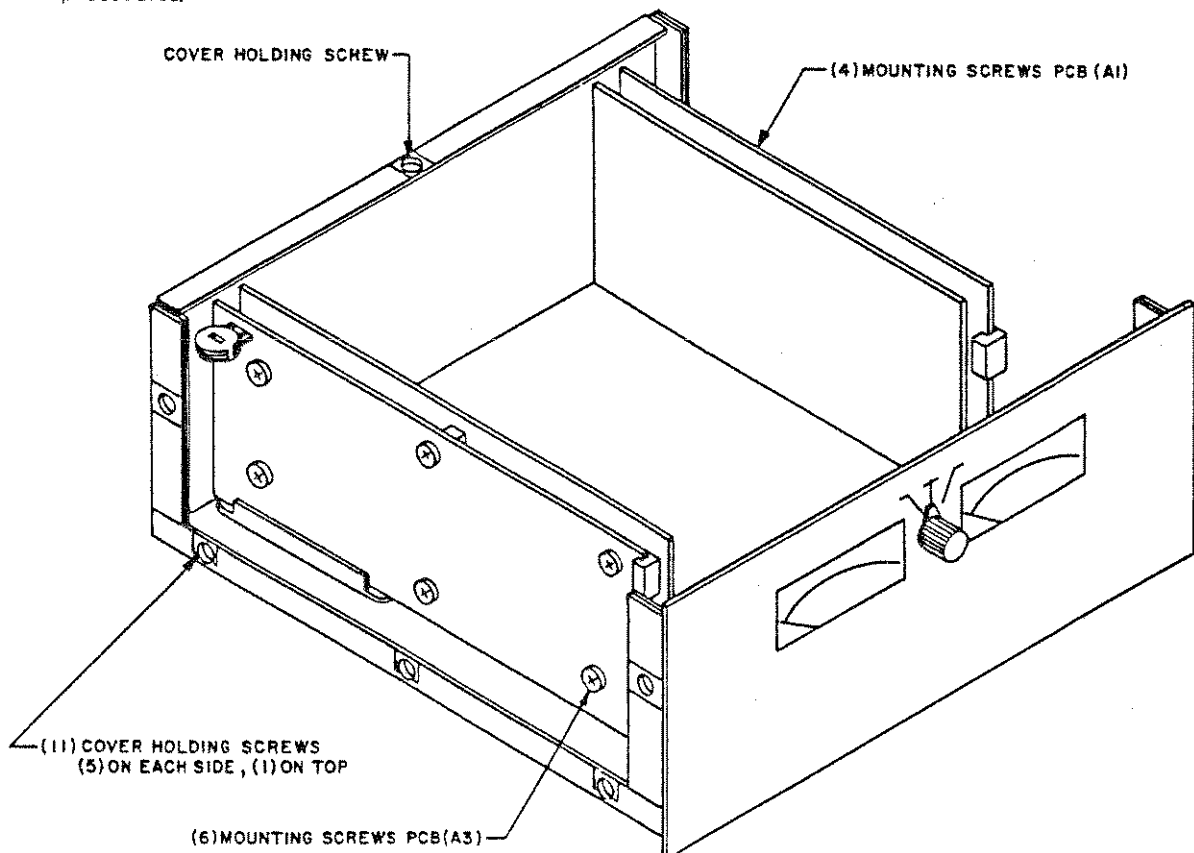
REMOVING THE WRAP-AROUND COVER AND THE PRINTED CIRCUIT BOARDS FROM THE MODEL MPS 620M.
